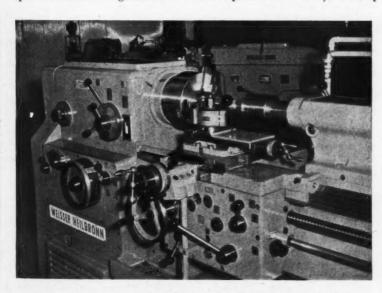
A close-up view of the Weisser Goliath heavy-duty centre lathe, which incorporates automatic high-speed screwcutting equipment
